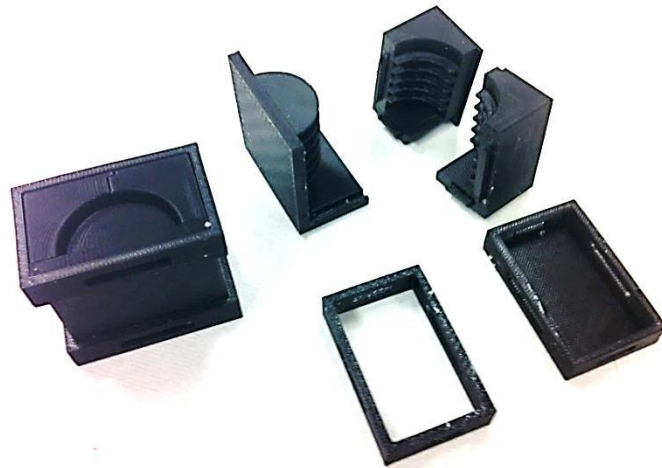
Real Parts Mold V2b for Second Version Extension Mechanism
